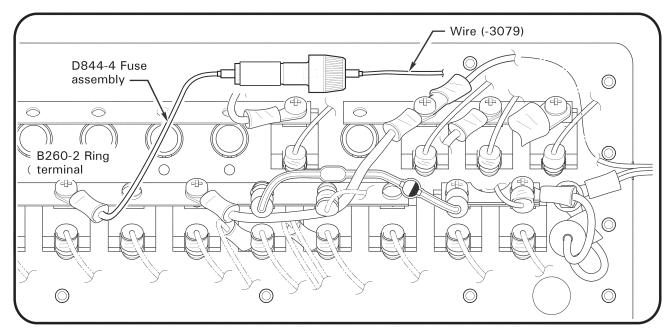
Fuse block assembly installation (location shown for D844-4 is typical)
